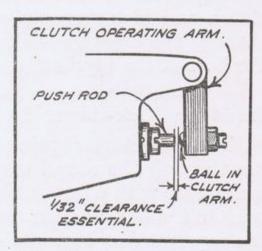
ILLUSTRATING THE CORRECT CLEARANCE BETWEEN THE CLUTCH LEVER AND PUSH ROD.
